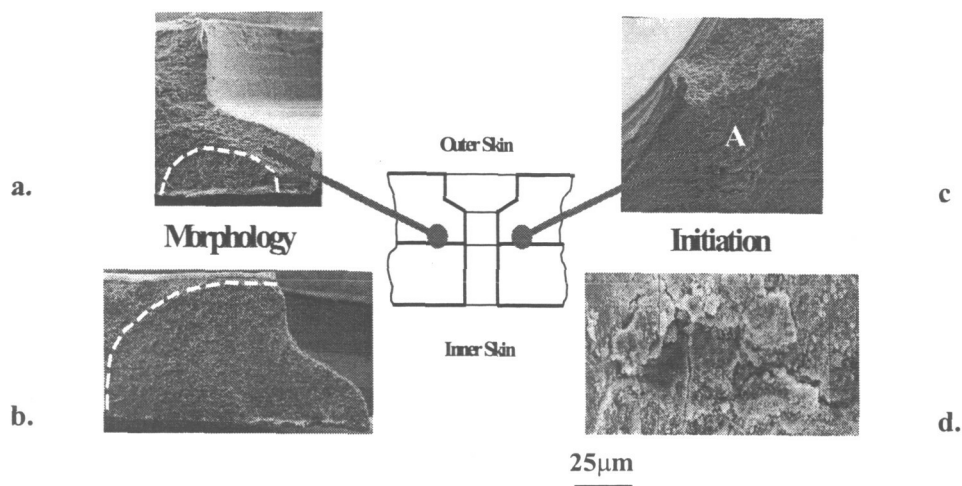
Counterbore rivet outer skin cracking: a) and b) SEM micrographs showing the progression of fatigue cracks (dashed lines mark the crack front), c) micrograph shows the rivet hole at an oblique angle and the location of fretting damage (region A) along the faying surface (site of crack initiation), and d) high magnification micrograph showing fretting debris and microcracks in "region A of Figure 2c".
